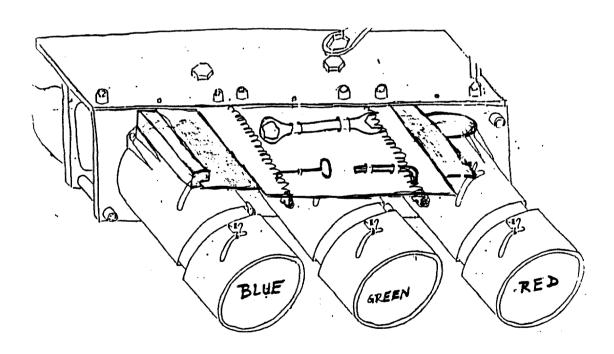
THE ECP 3000 TOOL KIT LOCATION
